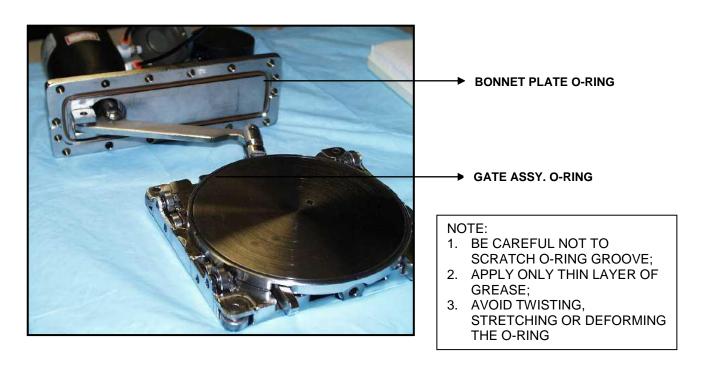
GATE O-RING AND BONNET PLATE O-RING
